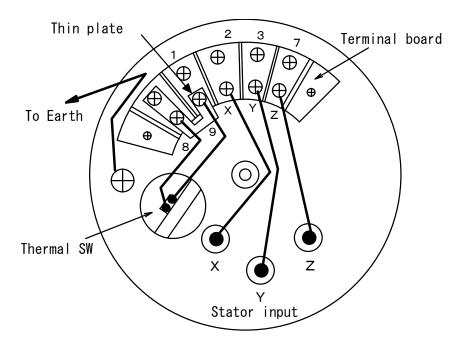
LOW VOLTAGE CABLE TERMINAL BOARD (TYPE2)
